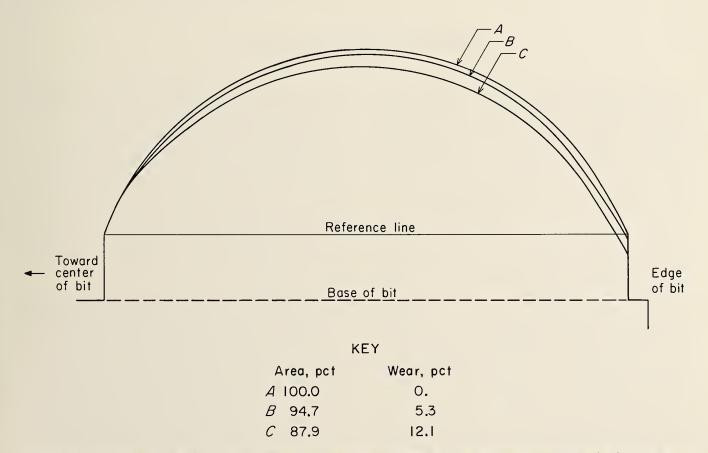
Cross-sectional view showing optical comparator wear profile of typical 12-mm tungsten carbide buttons from 51-mm button bit.
